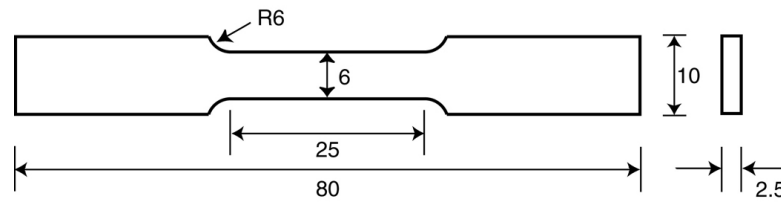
Tensile specimen geometry, dimensions in mm.
